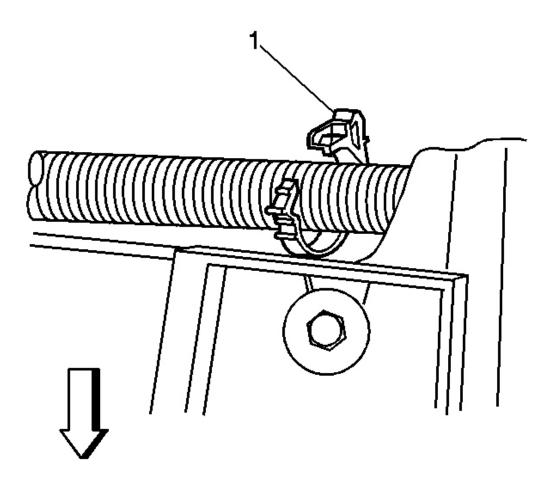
Identifying Headlamp Wire Harness Retaining Clip Courtesy of GENERAL MOTORS CORP.
